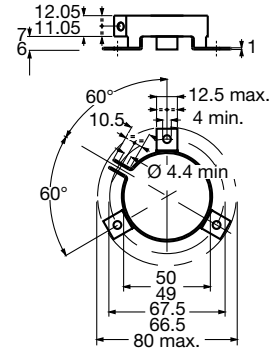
Dimensional outline of clamp for case Ø D = 50 mm
